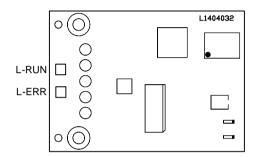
Reverse Side CC-Link Assembly Interface (AIFX-CC) with Matrix Label
